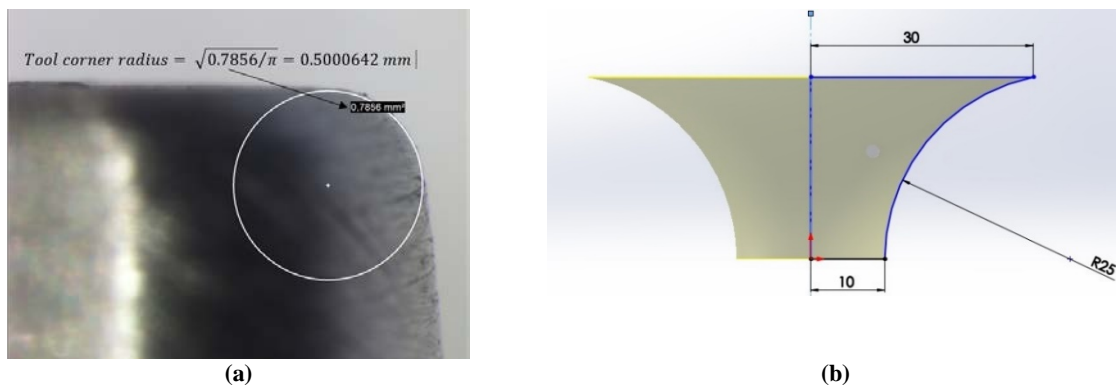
(a) magnified image of the tool with 0.5 mm corner radius, (b) Section view of the test geometry
